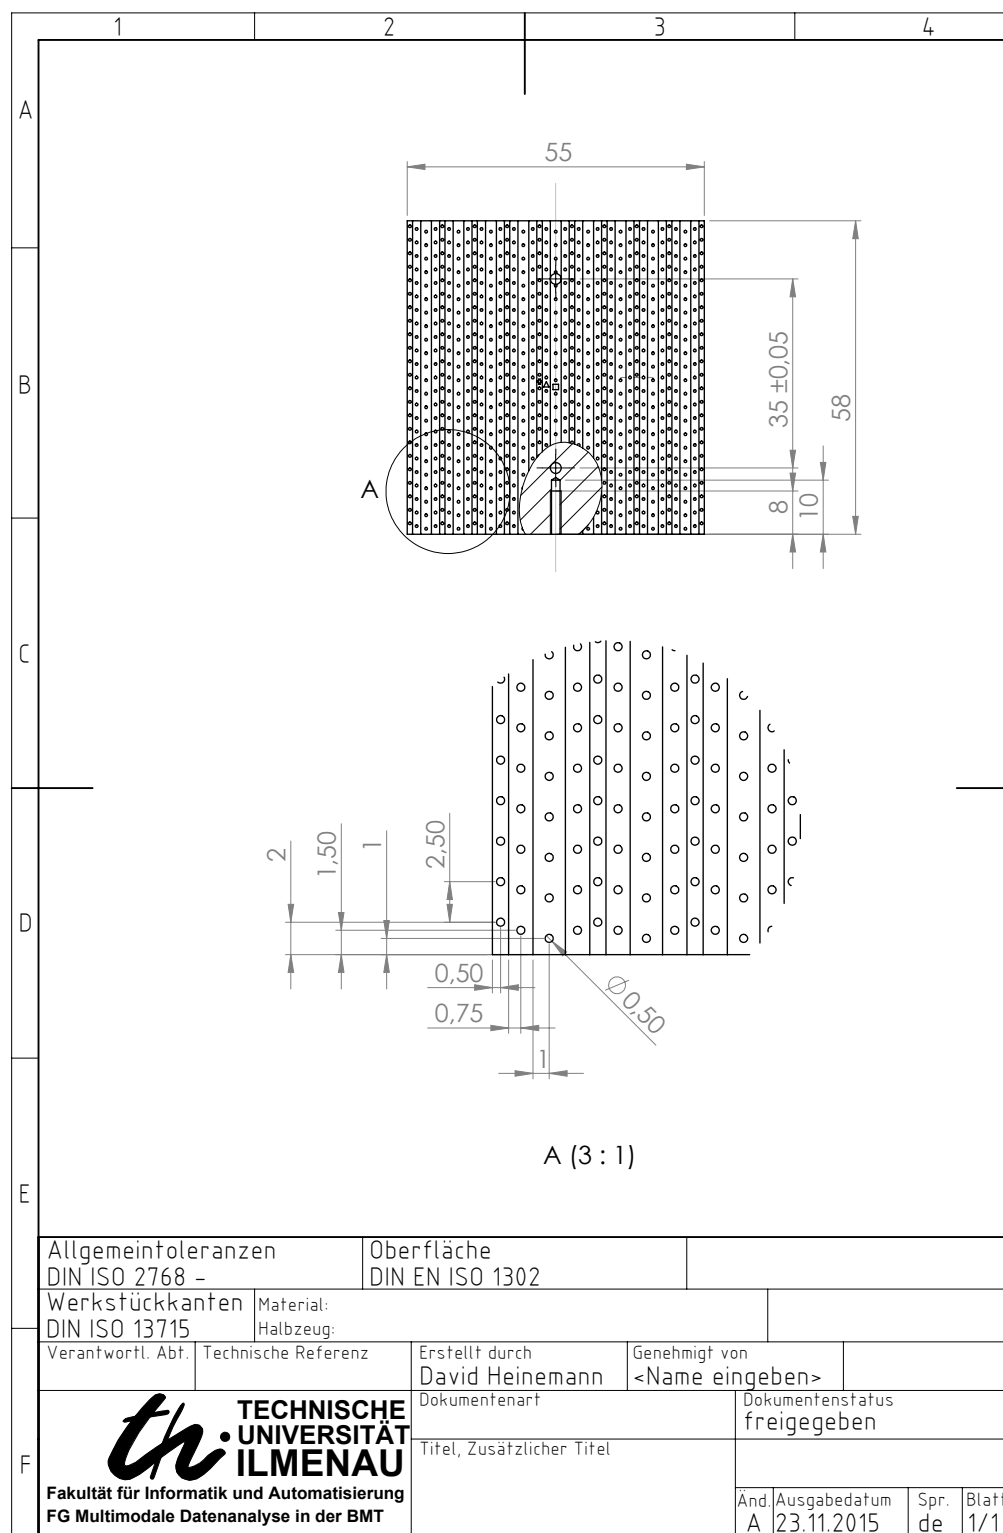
Engineering drawing of 3D calibration target - Detail 2.
